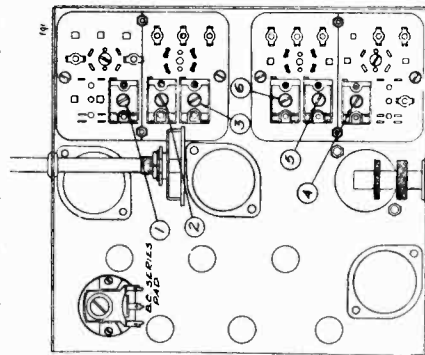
BOTTOM VIEW SHOWING TRIMMERS
